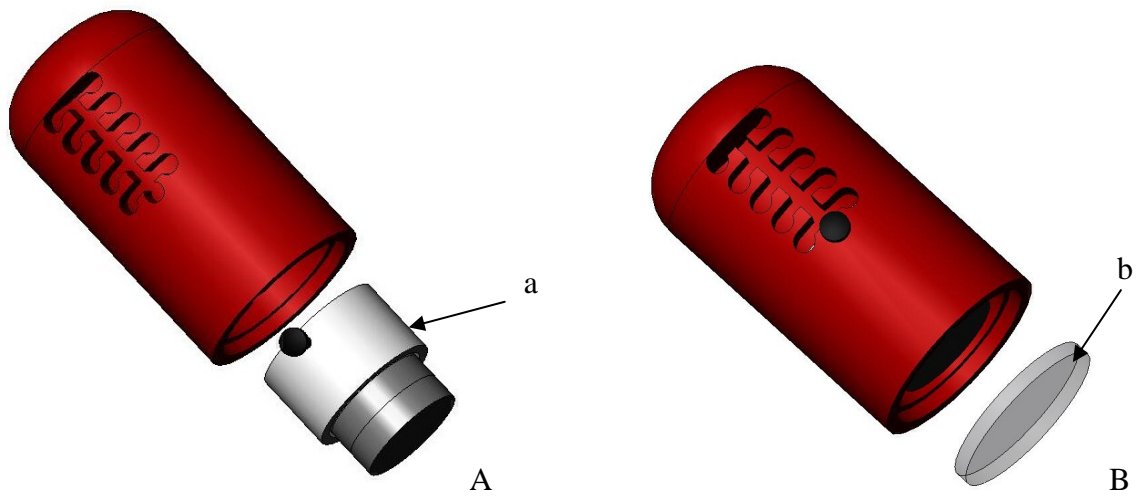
Magnet test structure assembly. The magnetic assembly (a) is slid into the aluminum housing. The lexan disc (b) is pressed into the aluminum housing.
